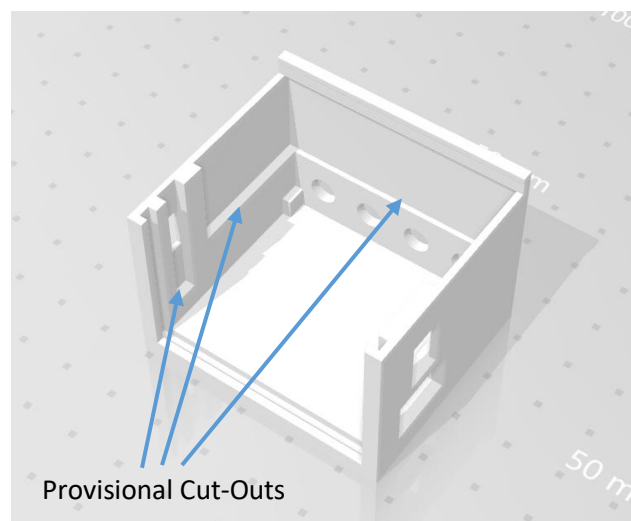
Primary component of Battery Module enclosure illustrating internal provisional cut-outs.
